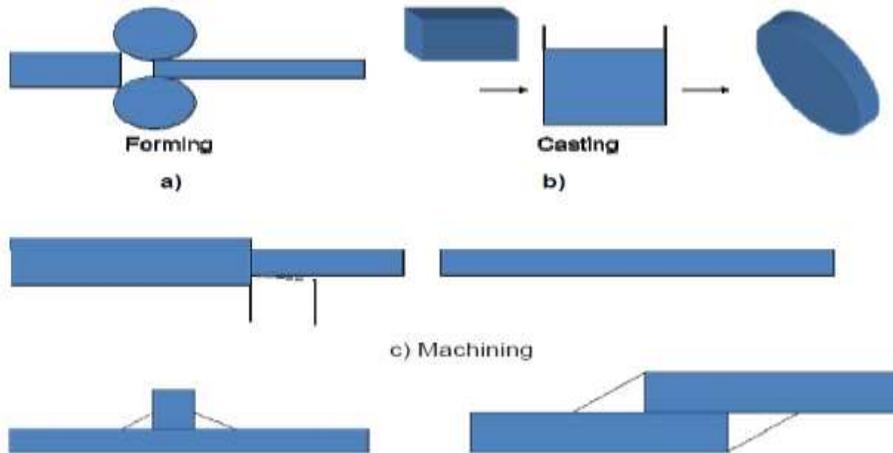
Schematic diagram showing shaping approaches using different manufacturing processes a) forming, b) casting, c) machining and d) joining
